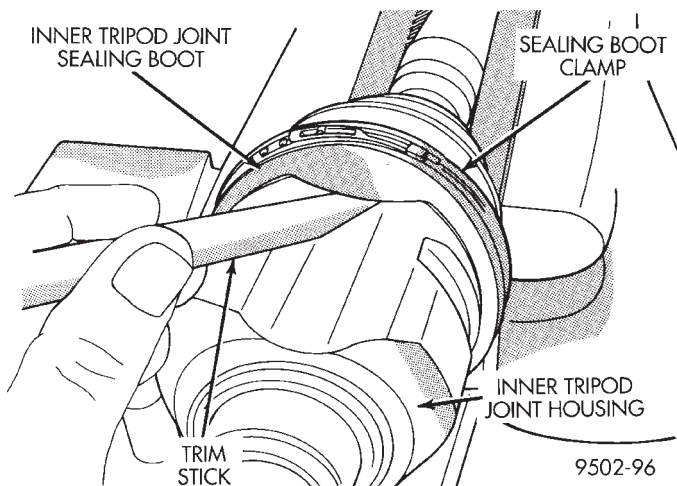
Trim Stick Inserted for Venting Tripod Joint
